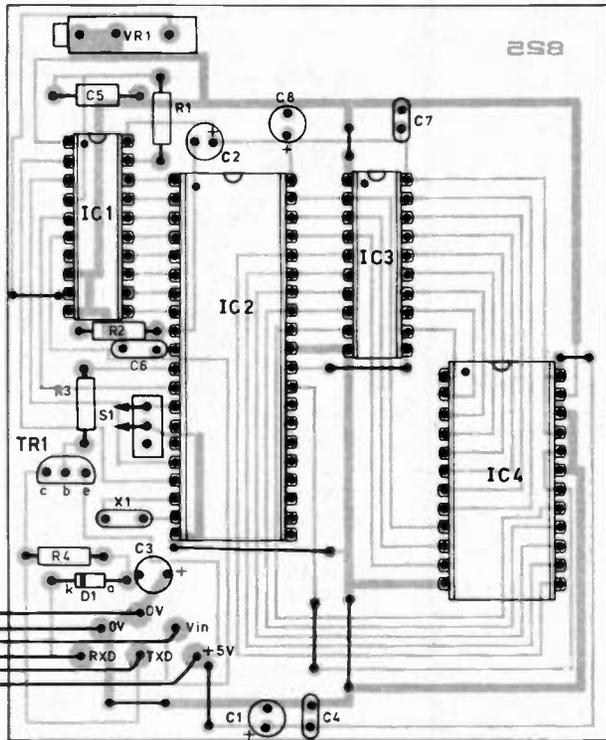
Printed circuit board layout and wiring of the Universal Data Logger.
